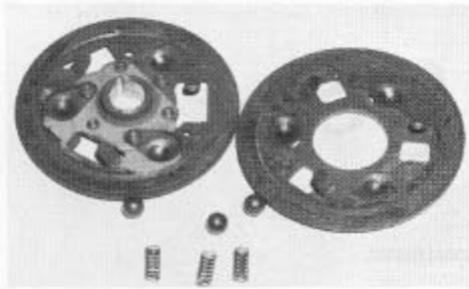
Disassemble clutch plates and inspect springs, balls, and ball ramps.
